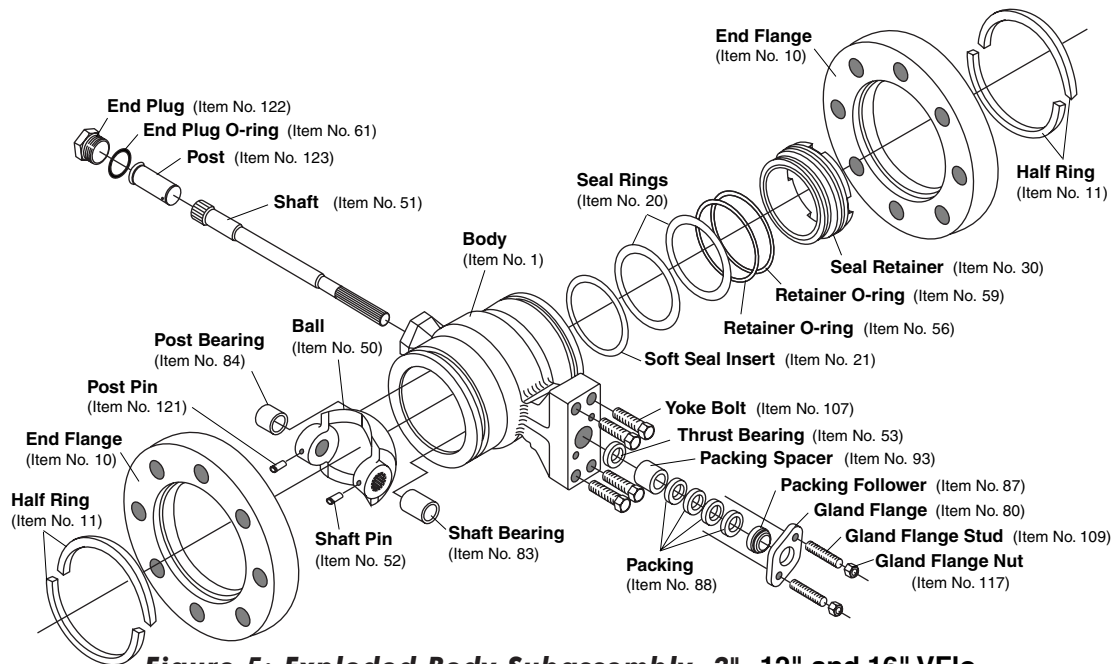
Exploded Body Subassembly, 3", 12" and 16" VFlo
